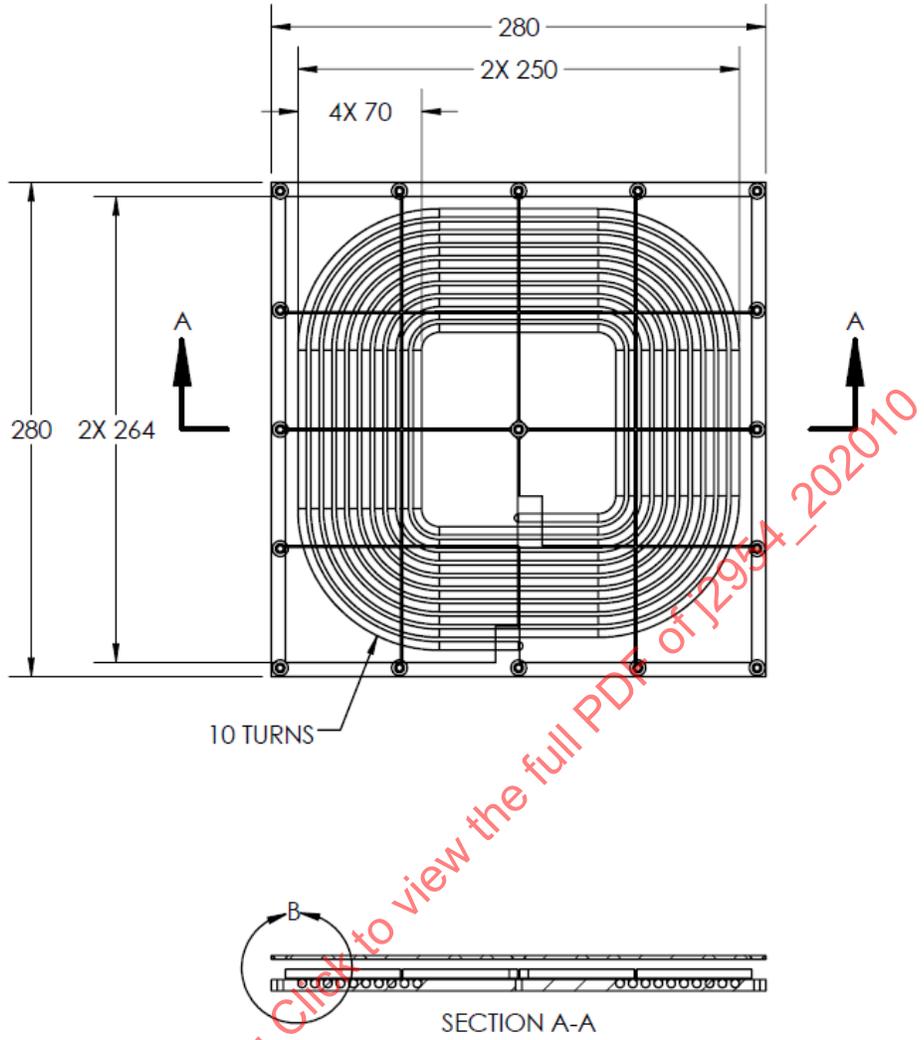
Mechanical dimensions of the Test Station VA WPT2/Z1
